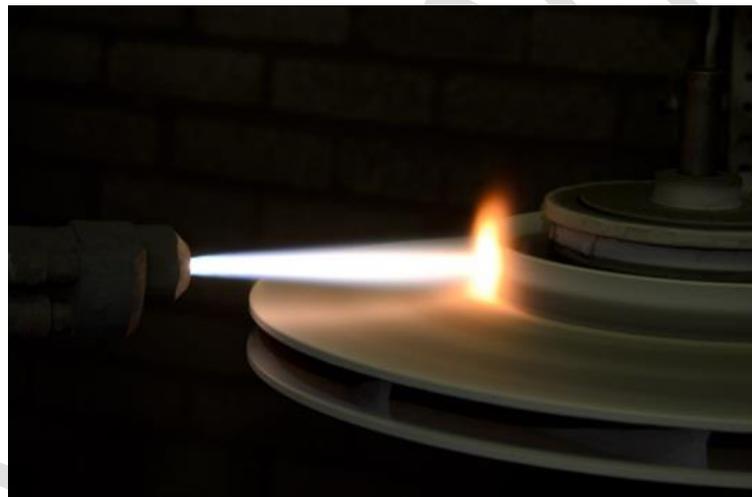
Pump impeller - thermally sprayed with the HVOF process
